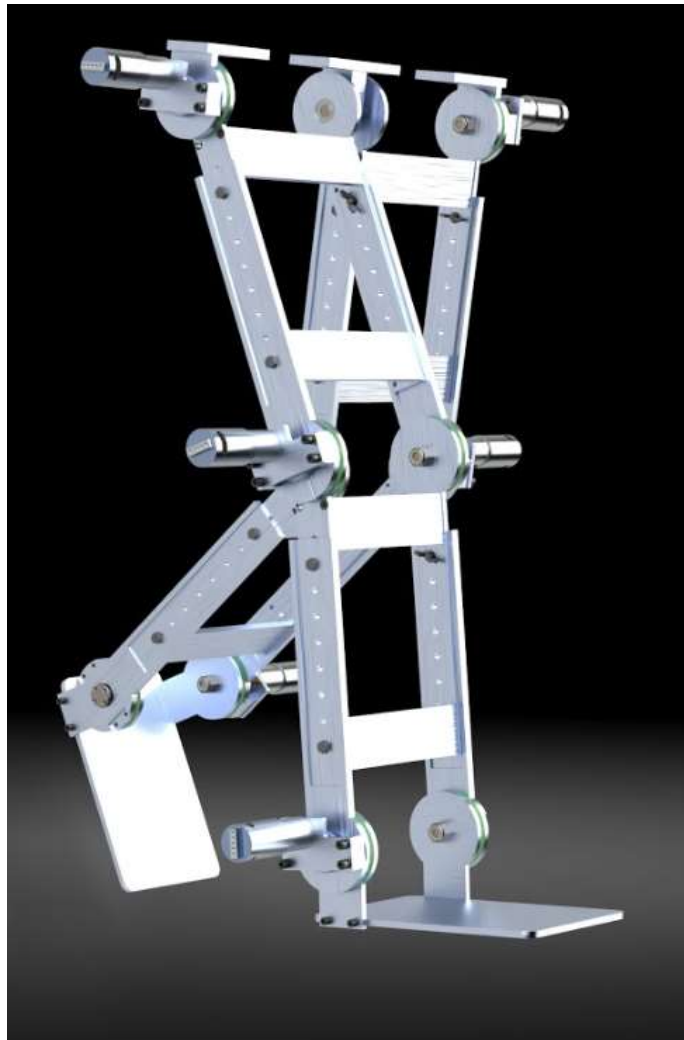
Leg Assembly Constructed of 6061 Aluminum.
